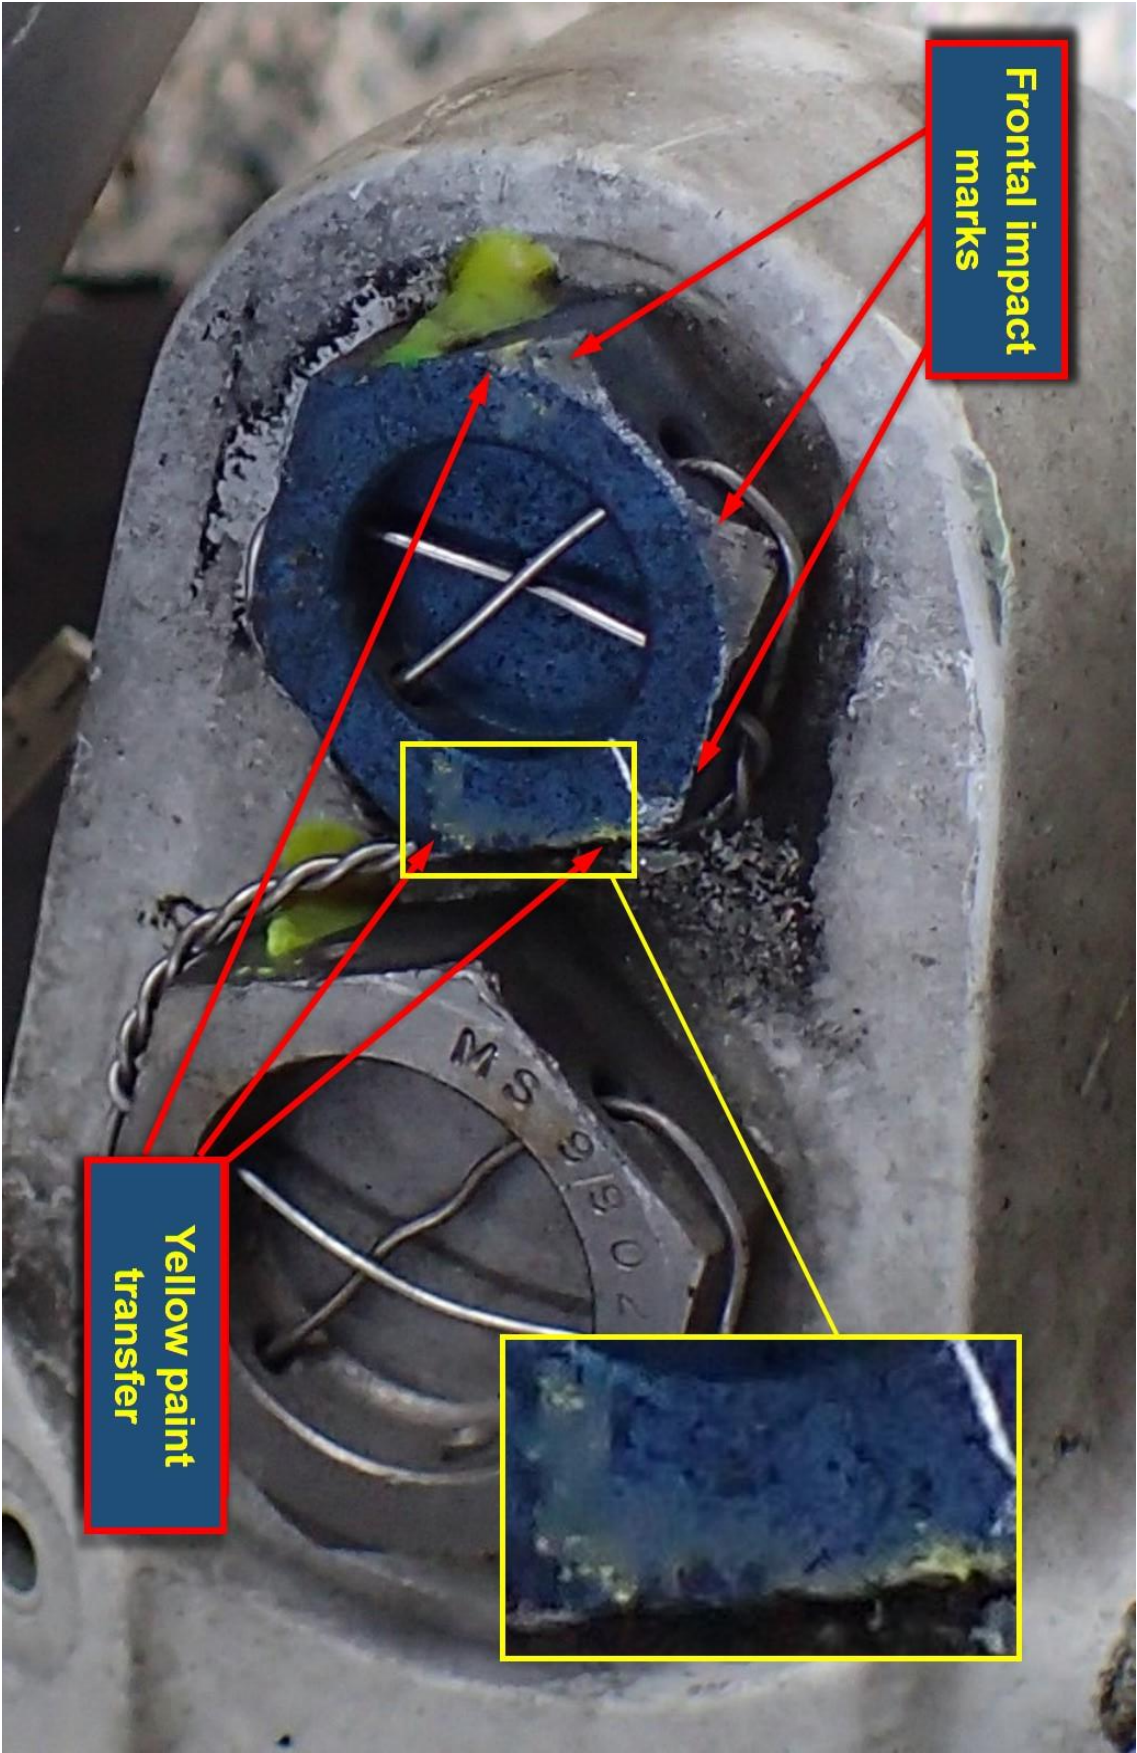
Frontal impact marks on the oil filling plug and paint transfer from the light fixture.
